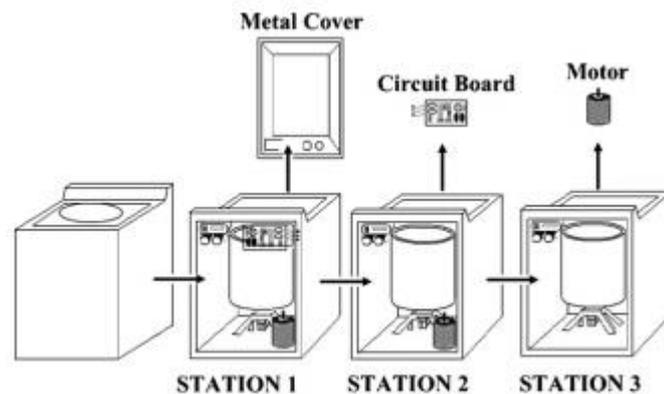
DISASSEMBLY PROCESS OF WASHING MACHINE (ILGIN & GUPTA, 2011)
